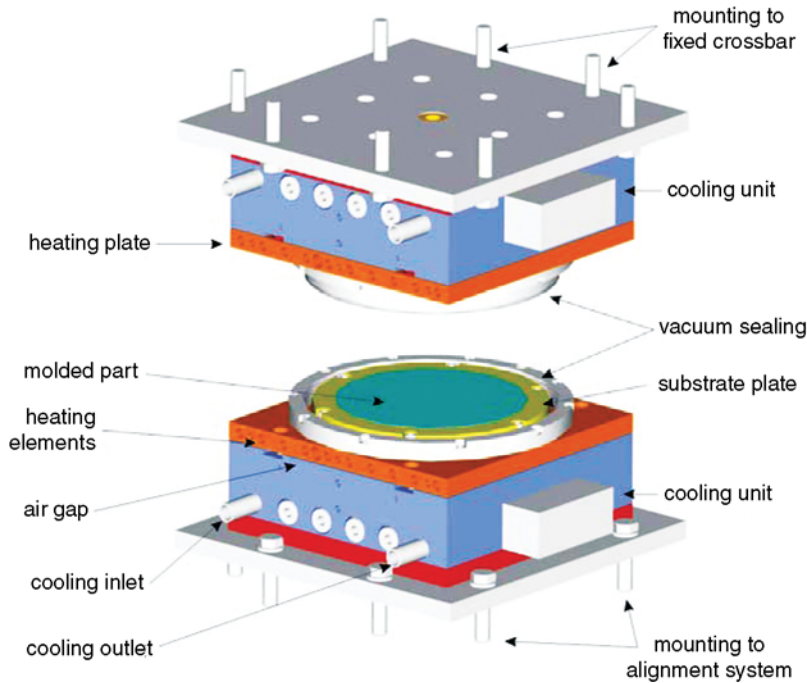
Schematic view of a basic molding tool with reduced thermal mass.
